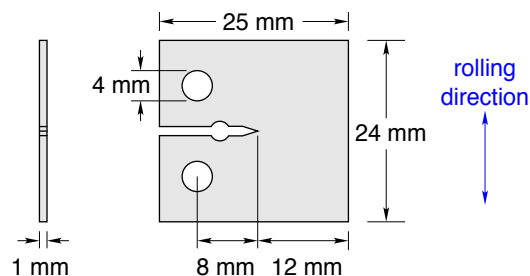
Compact tension samples conforming to ASTM E561 were cut with wire EDM from the cold-rolled sheets with the rolling direction perpendicular to the crack notch.
